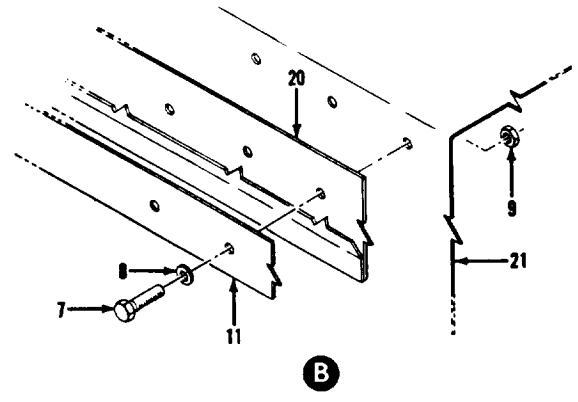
Environmental Chamber Structural and Mechanical Assembly (Sheet 1 of 4)
